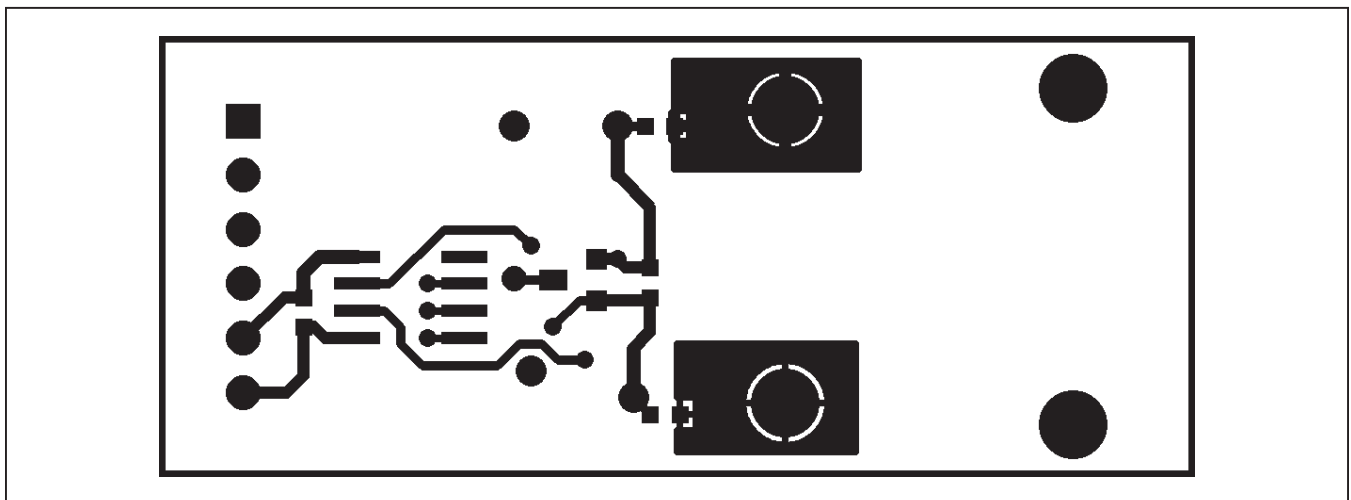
MAX31855PMB1 Peripheral Module PCB Layout—Component Side
